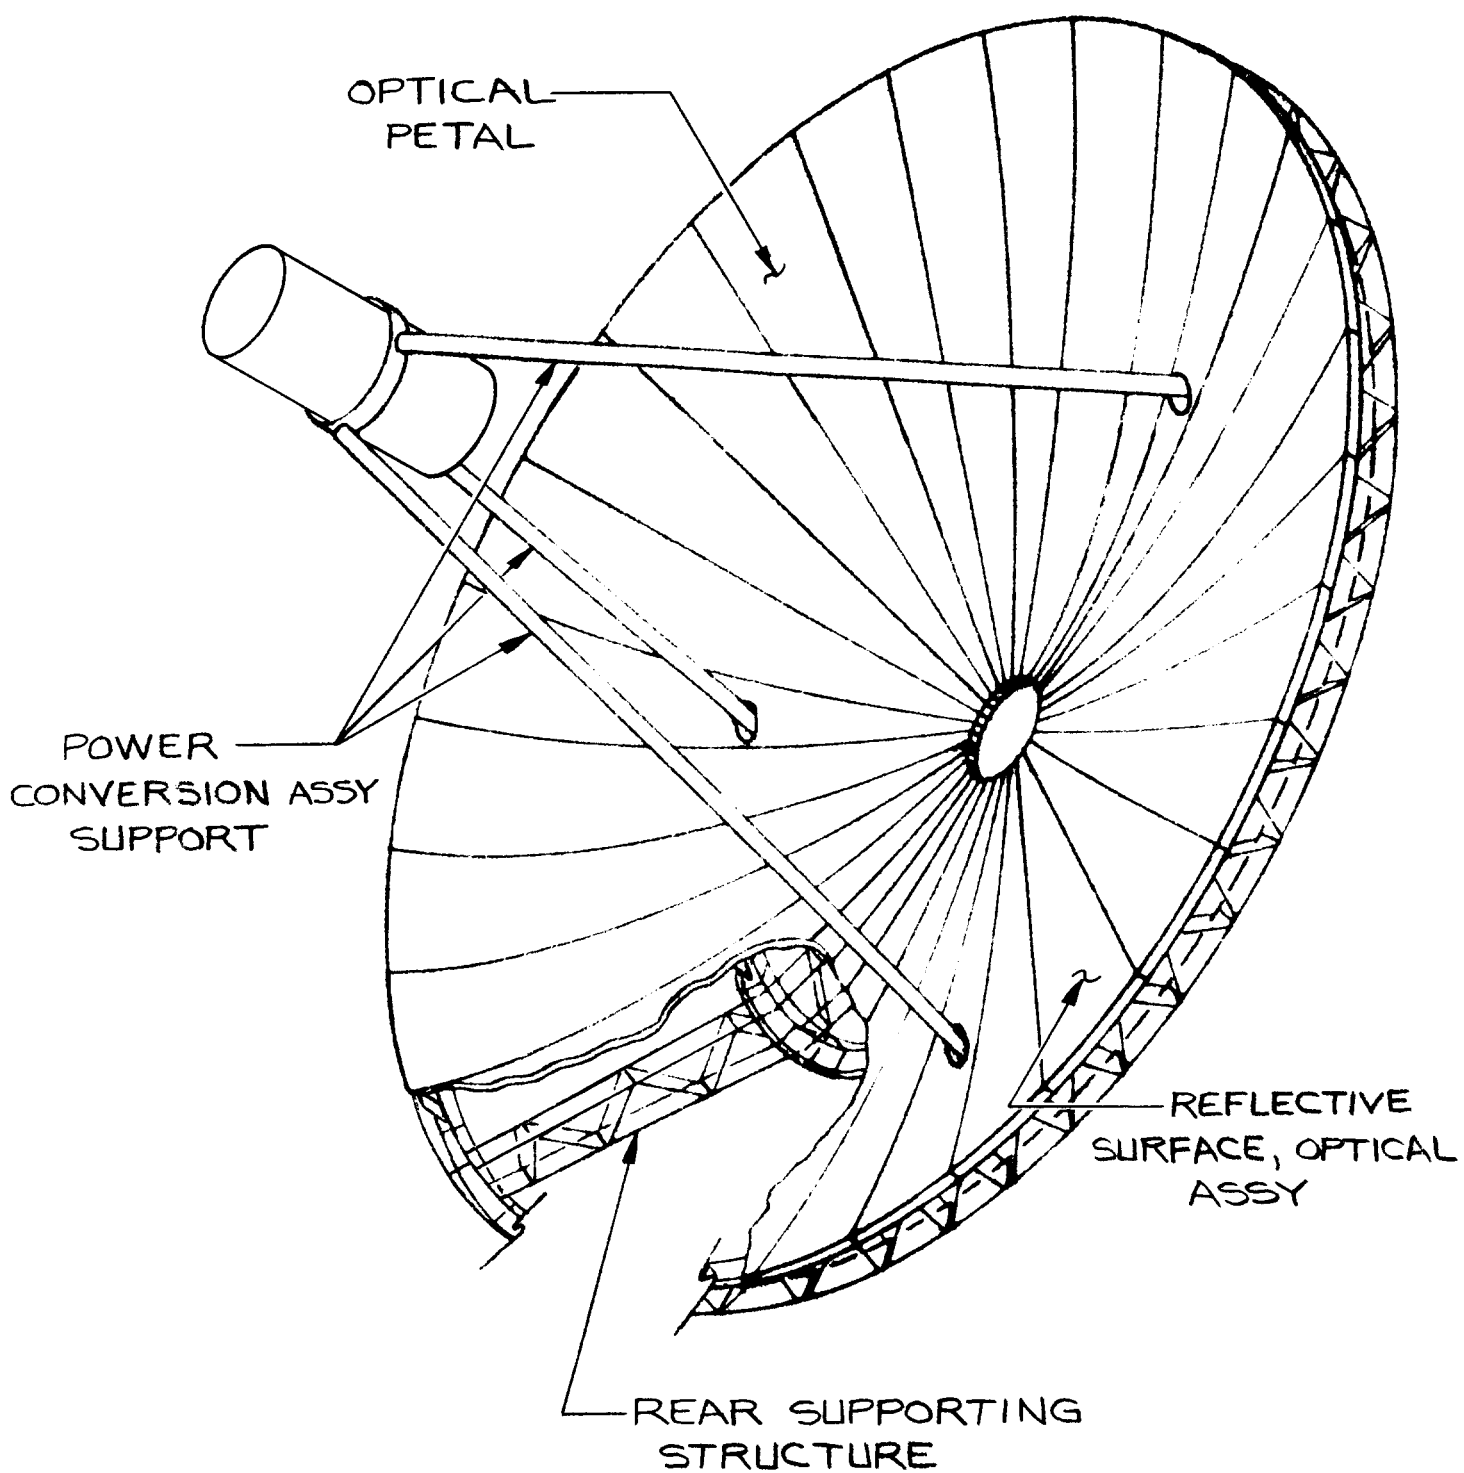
REFLECTIVE ASSEMBLY, FRONT VIEW
